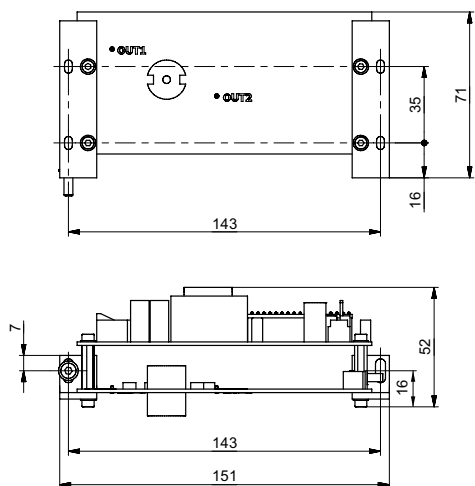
Outline drawing of OEM version DPB-10 and DPB-5 drivers with PS-5 power supply
